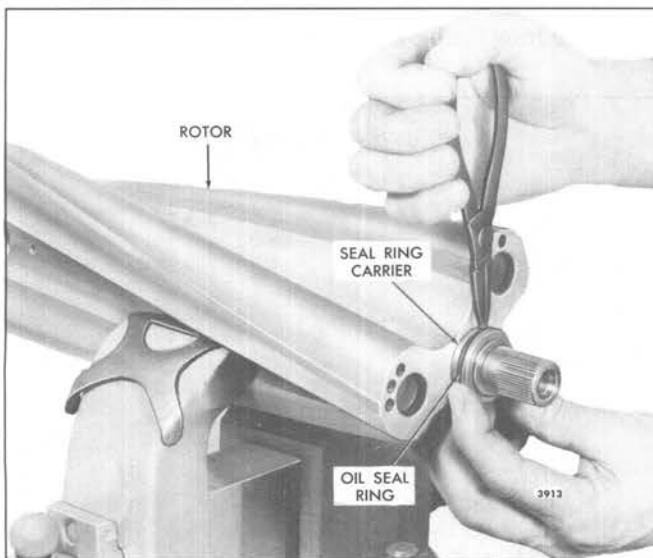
Removing Oil Seal Ring from Carrier (Turbocharged Engine Blowers)
